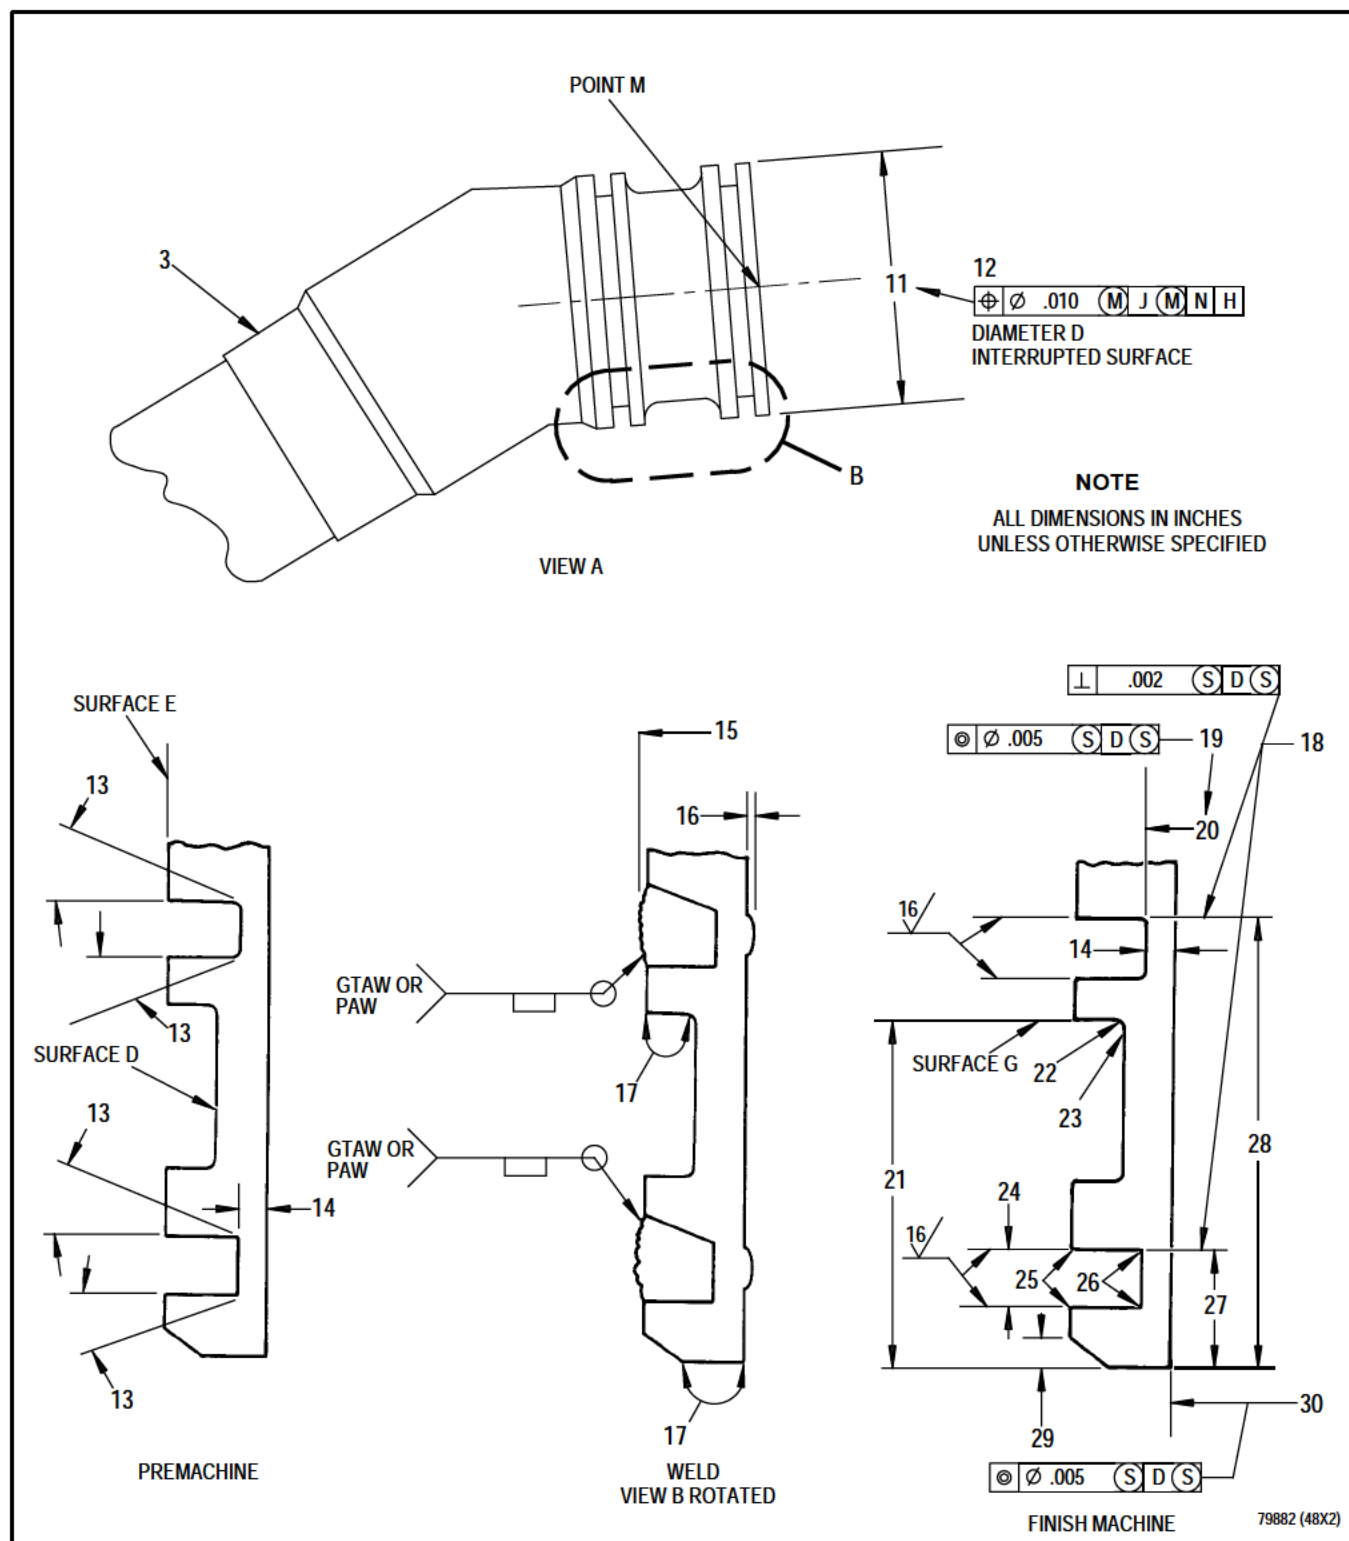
No. 4 Bearing Air Supply Tube Assembly - Ring Groove Weld Repair (Sheet 2 of 2)
